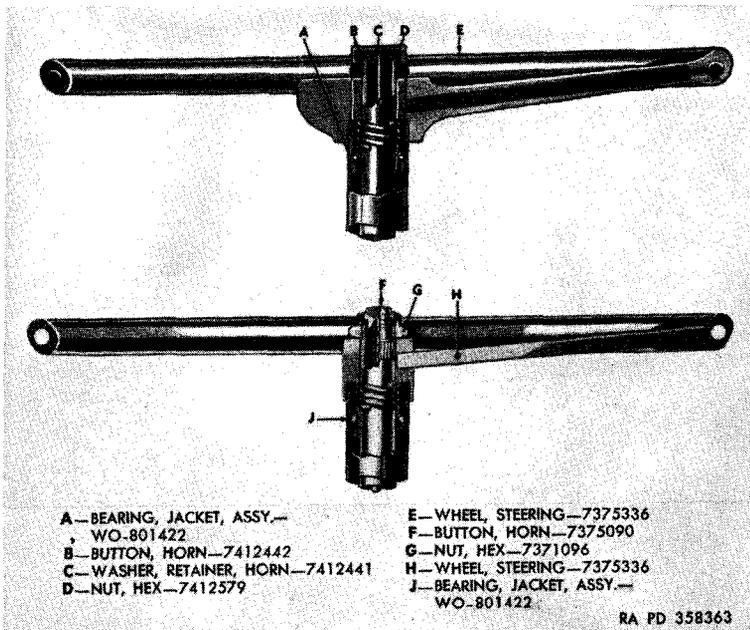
Steering wheel and horn button assembly—sectional view—both types.
